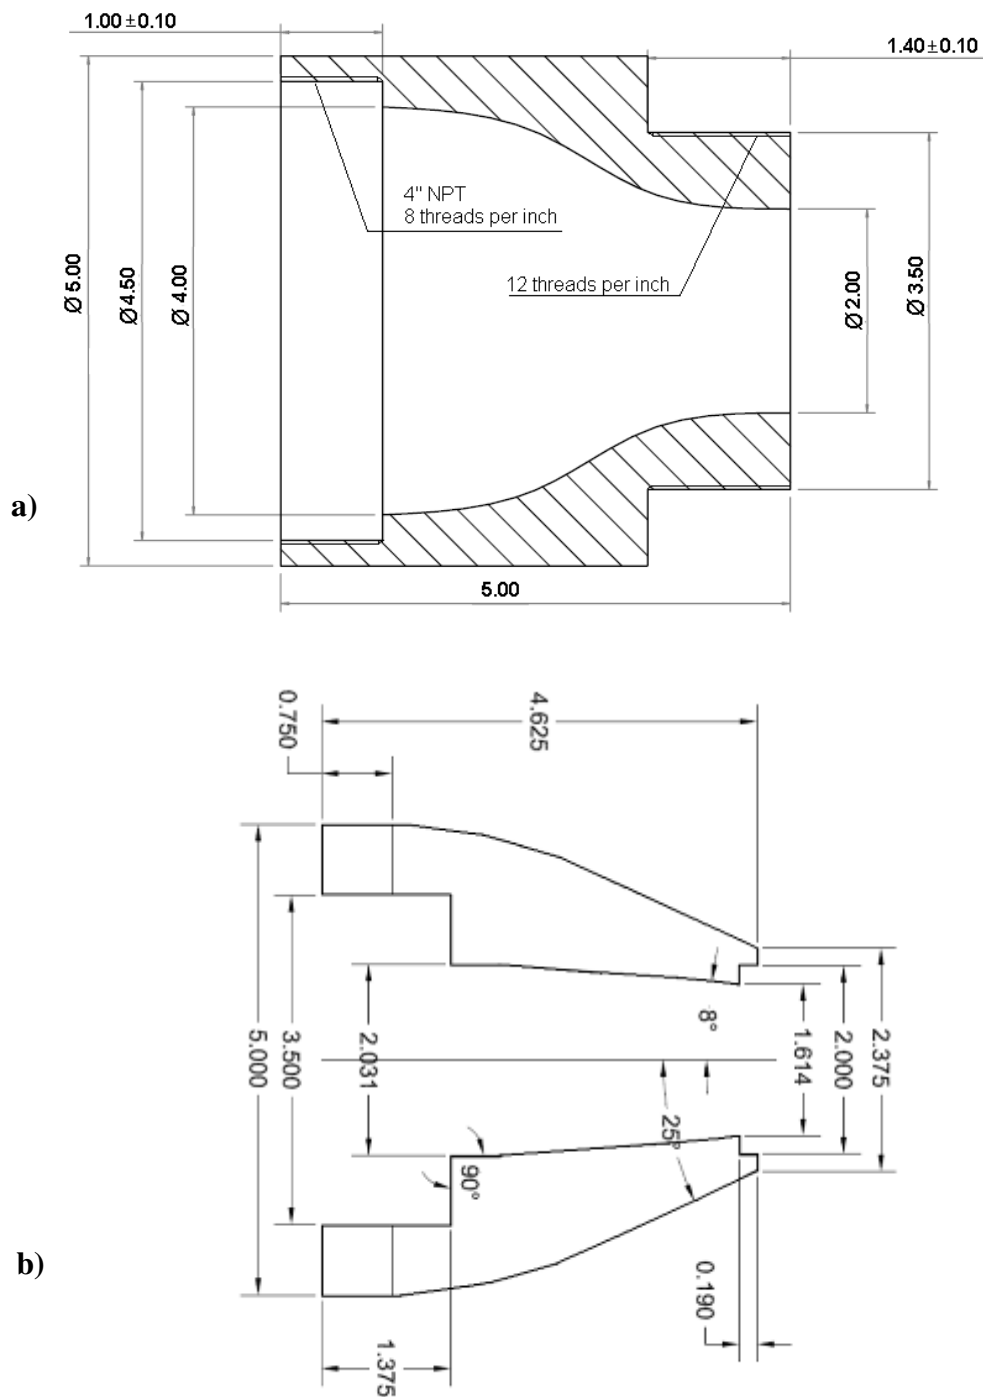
a) Adaptor between the plenum and the manifold, b) manifold at the end of which the nozzles are mounted
